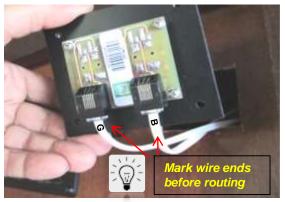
B RJ 11 ends exit from cutout and plugged into switch panel
